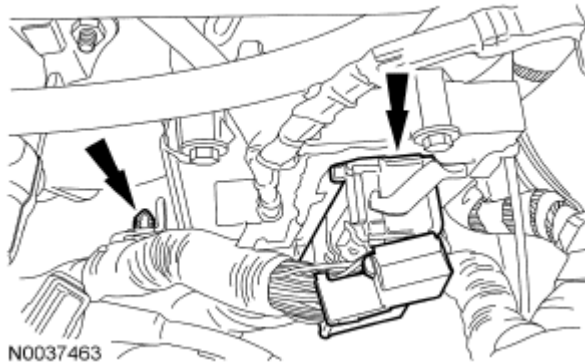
Locating Powertrain Control Module Electrical Connector And Pin-Type Retainer
